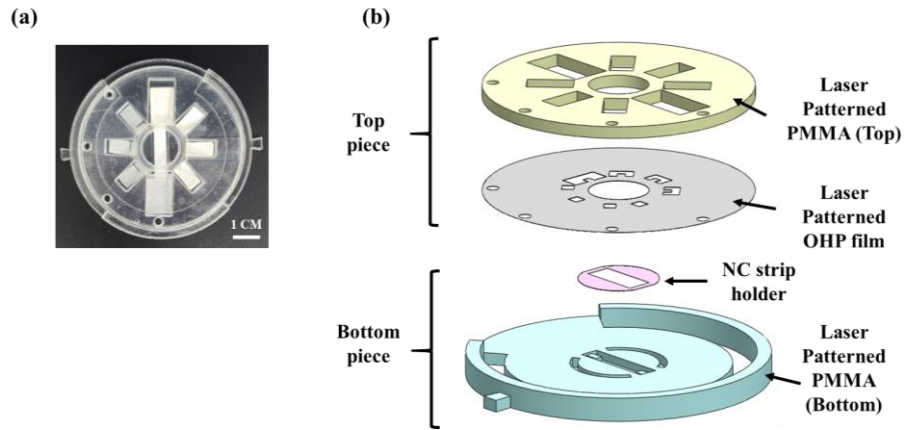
The rotary device (a) Photo of the rotary device with the NC membrane, glass fiber pads, and absorbent pads installed in it. (b) Exploded view of the rotary device showing each layer and its components.
